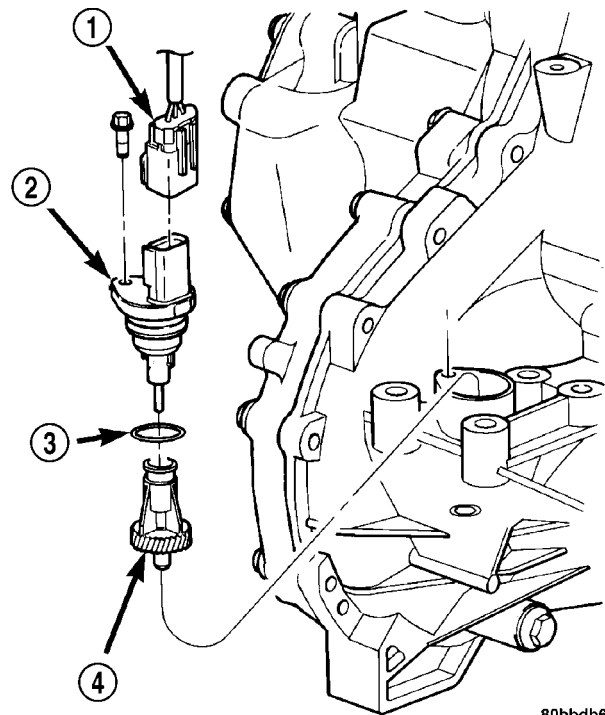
Speed Sensor and Pinion—Removal/Installation
